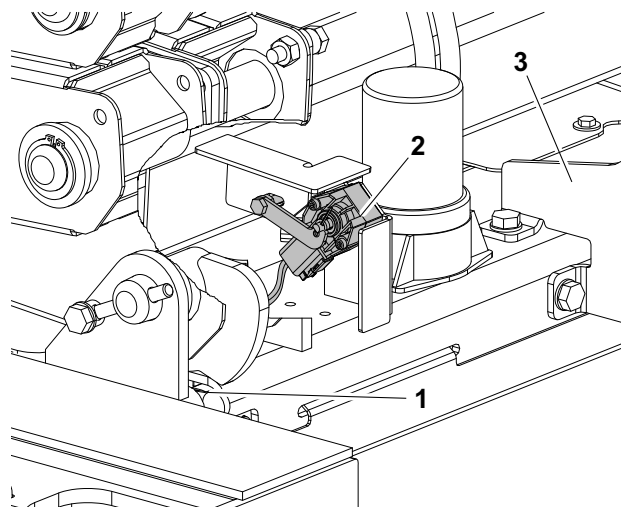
3248RS/10RS - Elevation Limit Switch Adjustment
